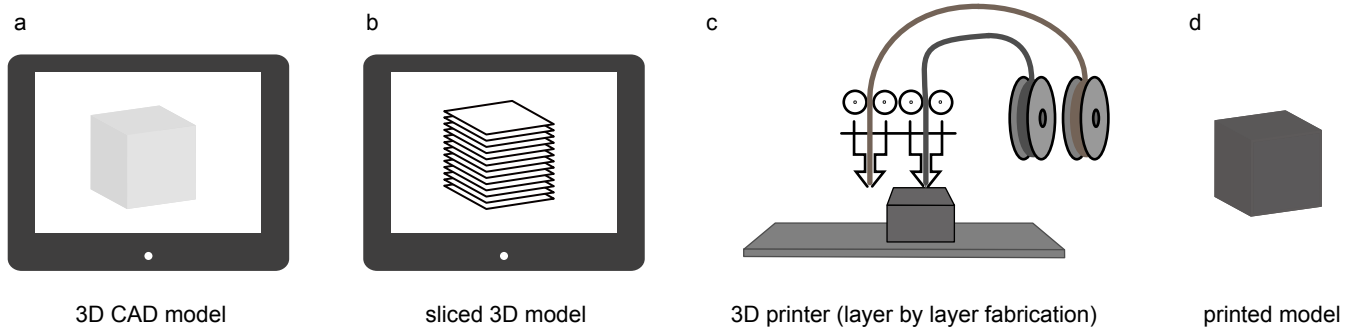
3D printing principle. a) 3D model design using CAD software, b) Before printing step, 3D model should be sliced using STL format, c) Based on STL data 3D printer fabricates the 3D model layer by layer, d) three-dimensional final product ready for use.
